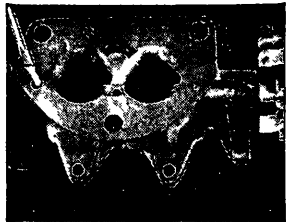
Idl circuit. Install throttle shaft and lever and the throttle centering screw. Back out the throttle lever adjusting screw
